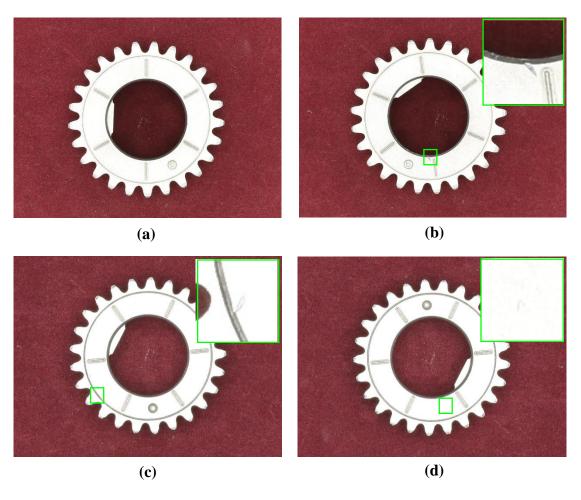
Mechanical parts. (a) A normal part. (b-d) Parts with tiny surface defects. From the view of engineers, the scratch with over 0.5mm depth is considered as a defect).
